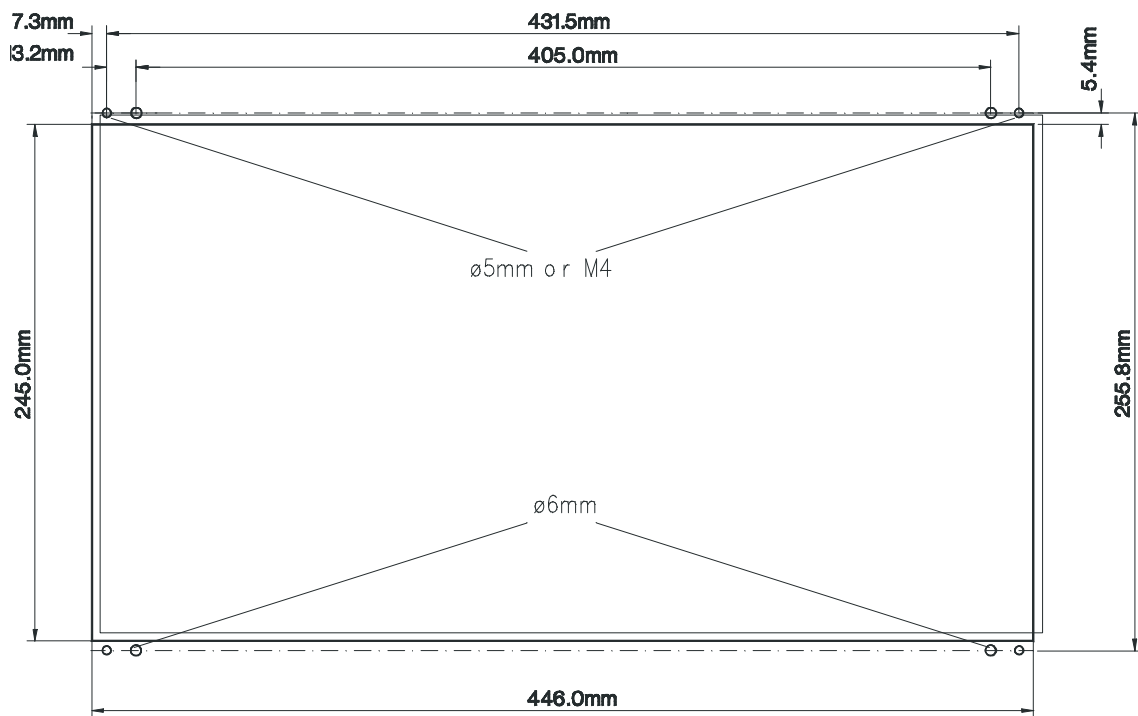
Dimensional drawing, panel flush mounting; ZE 32/64 (2)
